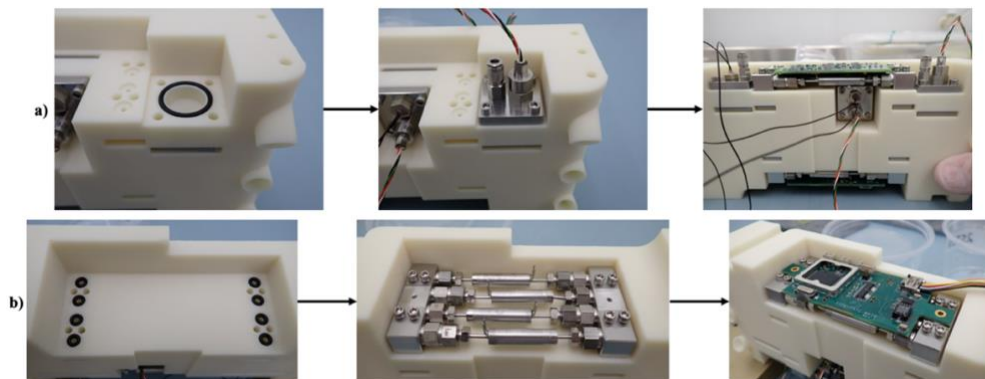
Integration of a) fill-sensor manifold plate and b) valve manifold subassemblies onto the printed structure.
